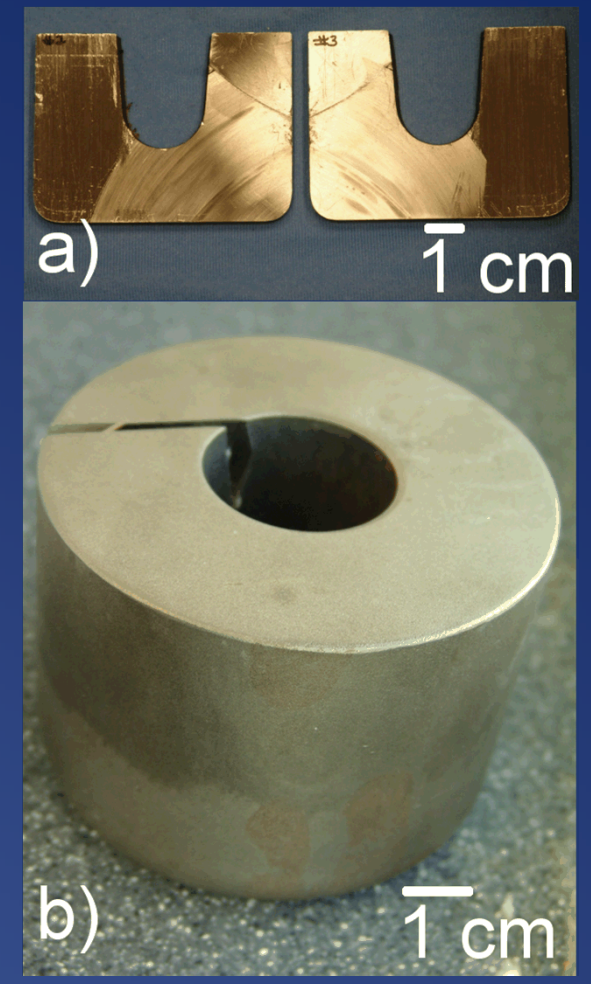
a) Two slices cut from forging. b) Forging with first cut visible.
